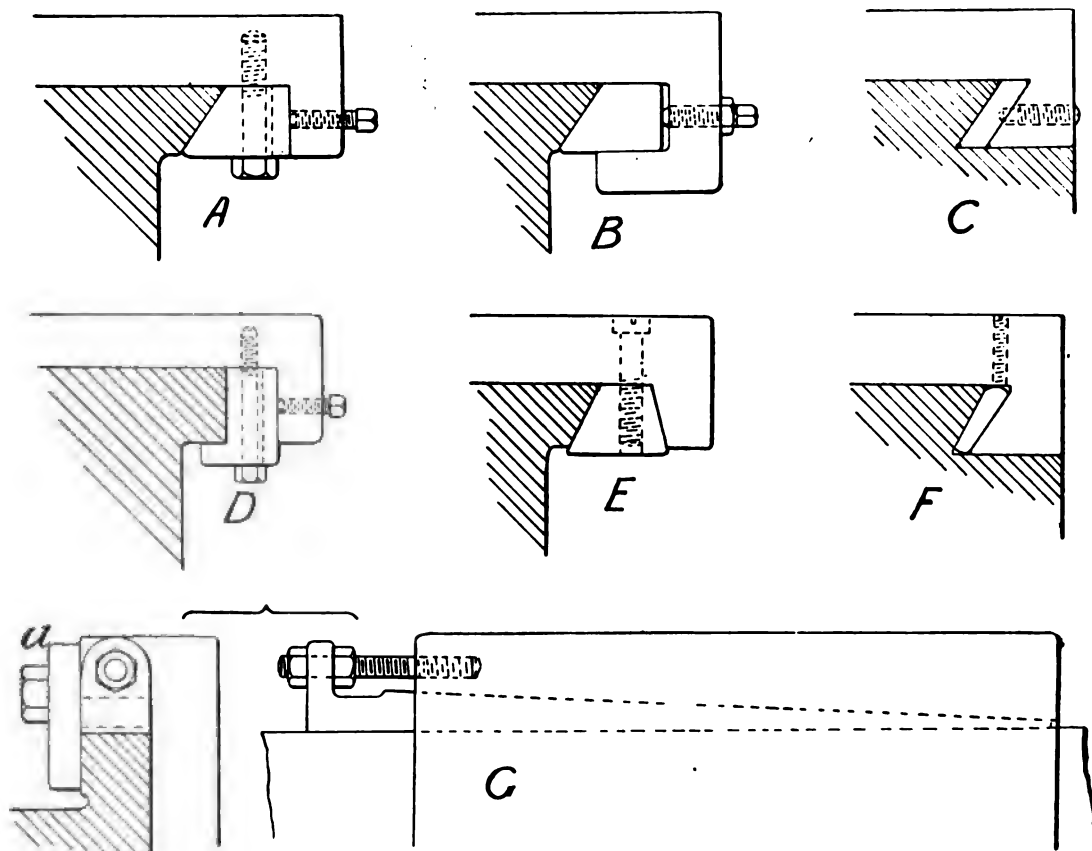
A.* Common Vee strip, with clamping and setting-up screws. *B.* Vee strip supported by ledge of slide. *C.* Thin strip supported by ledge. *D.* Square-edged strip. *E.* Wedge strip pulled up by screws. *F.* Thin wedge strip pushed down by screws. *G.* Longitudinal wedge strip, adjusted by nuts on stud. *a.* Plate to prevent lifting of slide.
